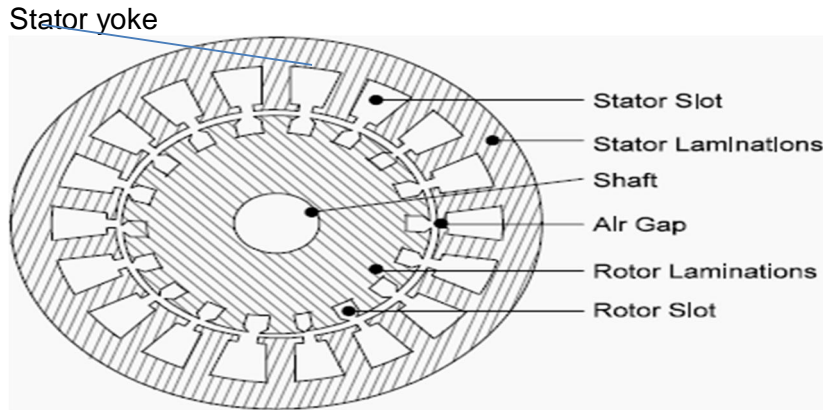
Dimensional Structure of the Stator and Rotor for Synchronous Motor
